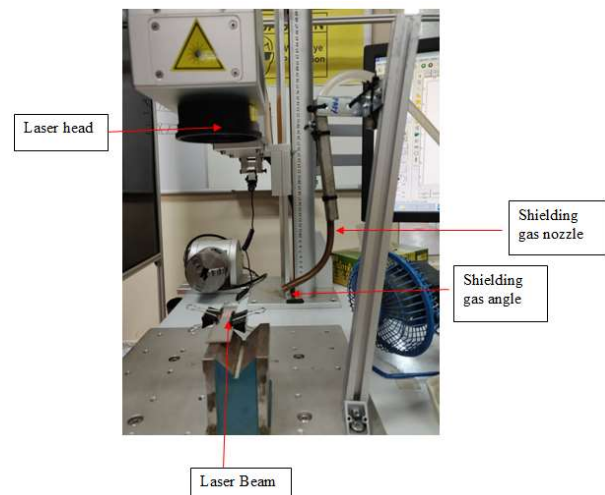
IPG YLM 200/2000 – QCW Fibre laser machine for the welding process
